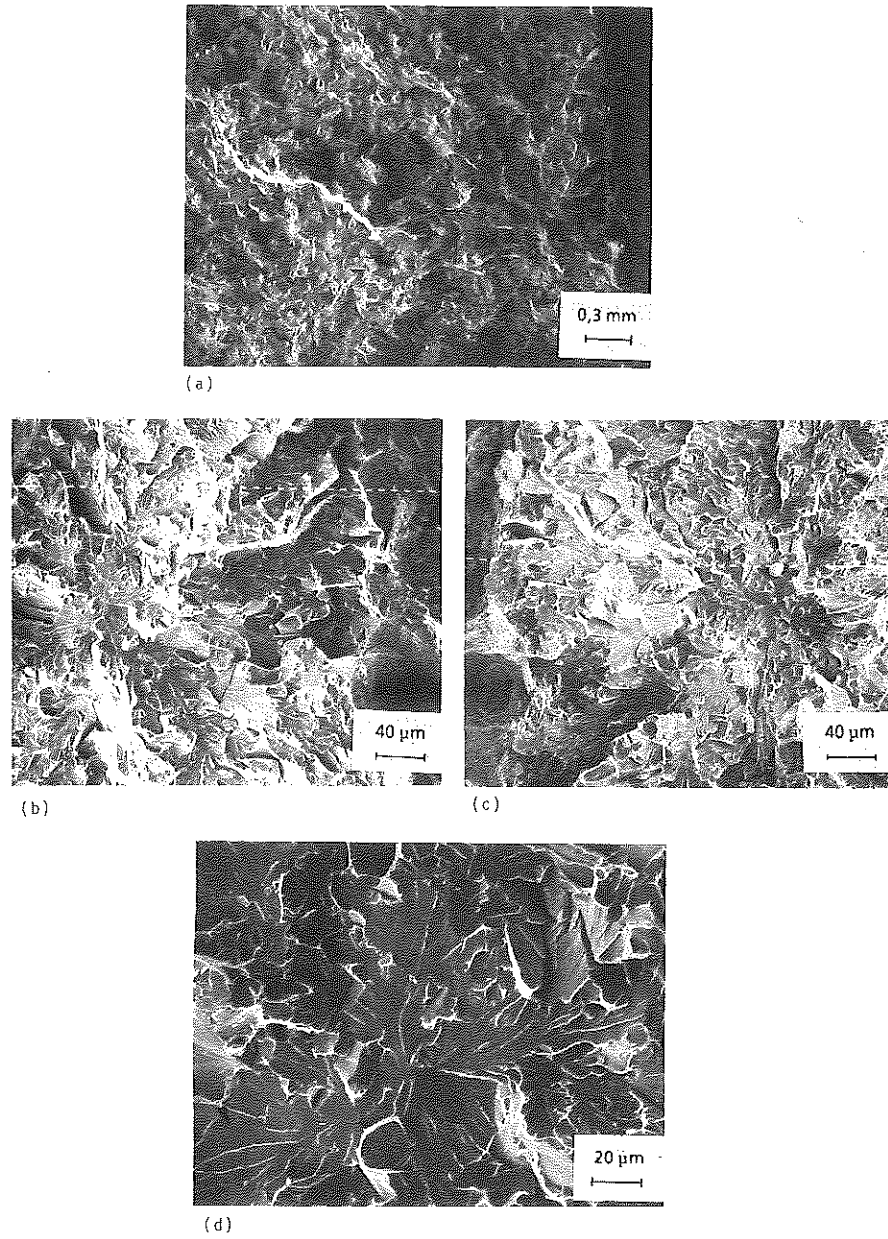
Identification of a fracture origin on both broken fracture surfaces
